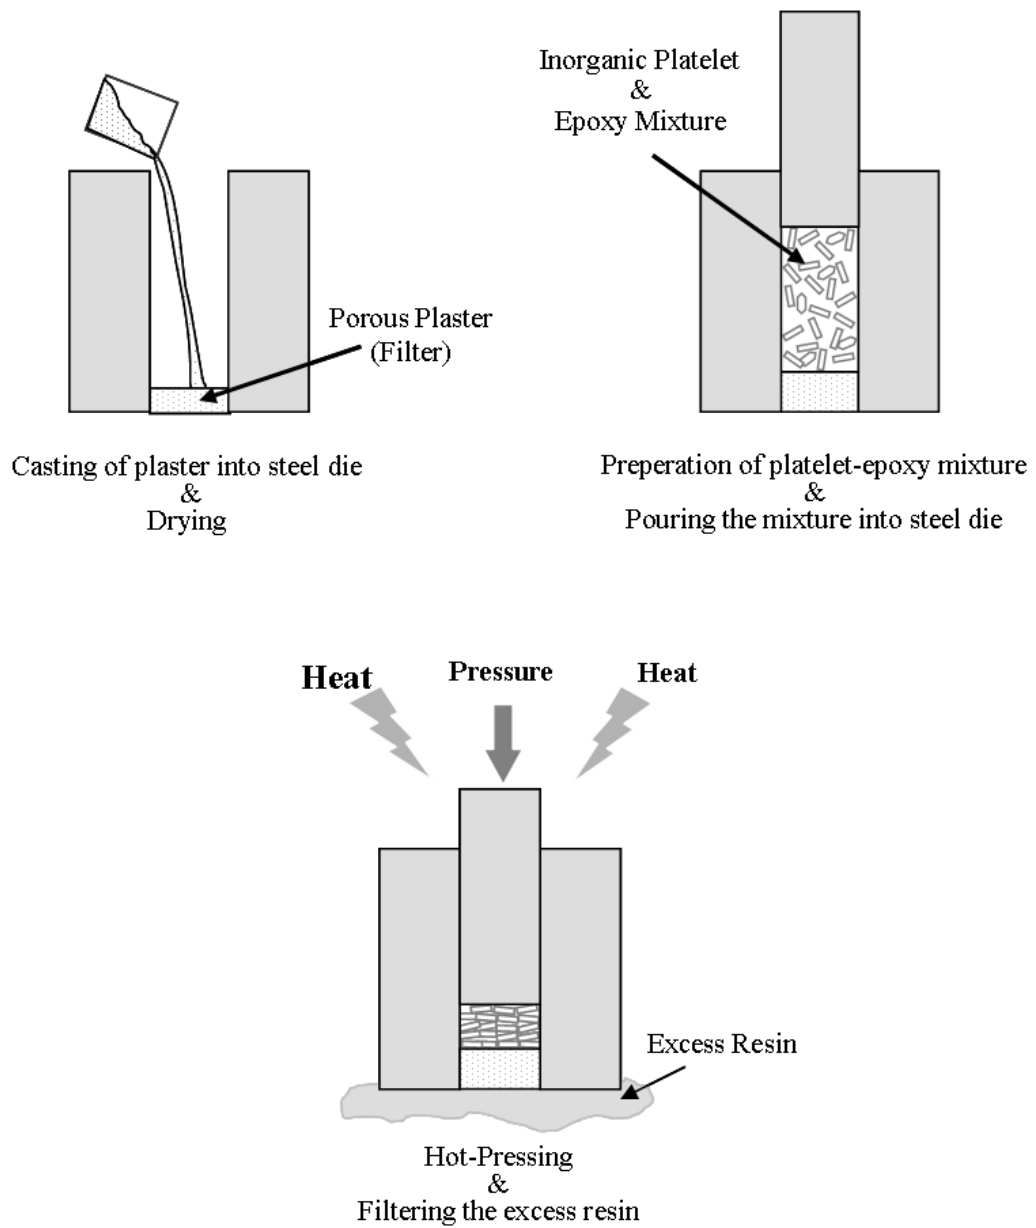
Schematic illustration of Hot-press Assisted Slip Casting Method (HASC).
